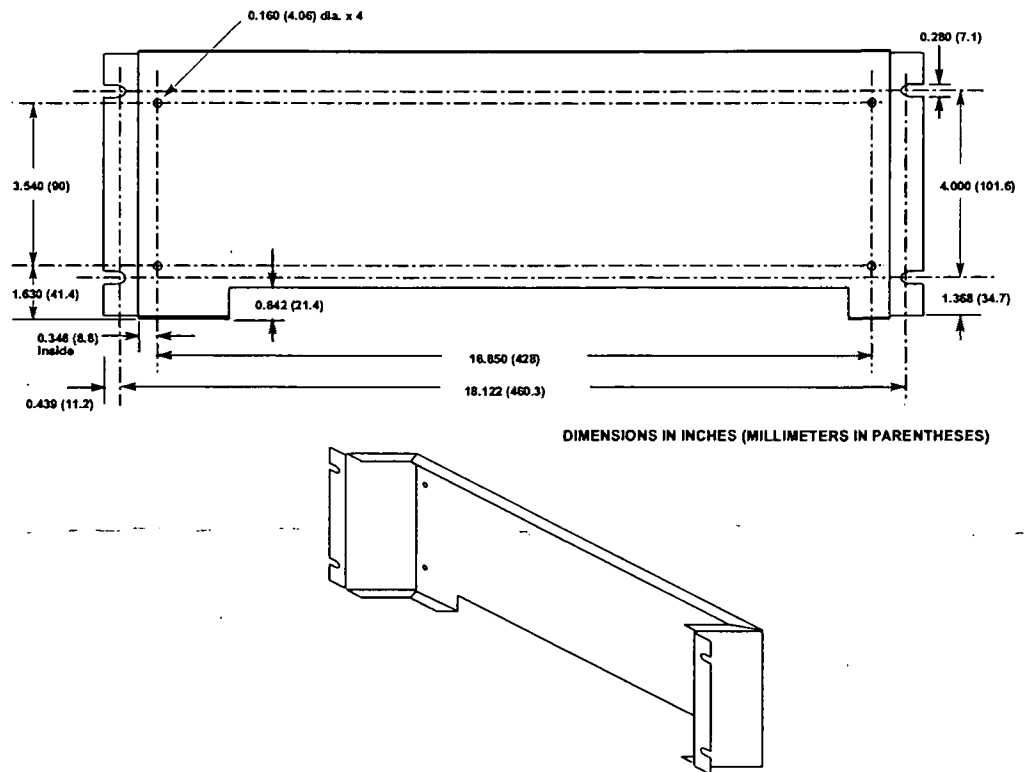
IC693ACC313 Recessed Mount Adapter Bracket
